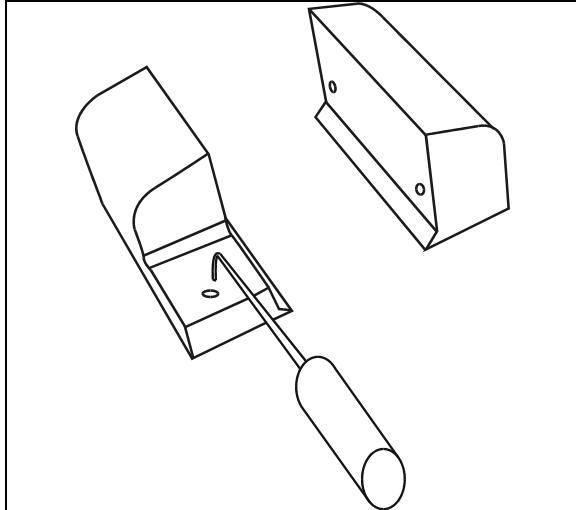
REMOVE THE UPPER ACETAL PLASTIC BLOCKS WITH A PICKING TOOL
